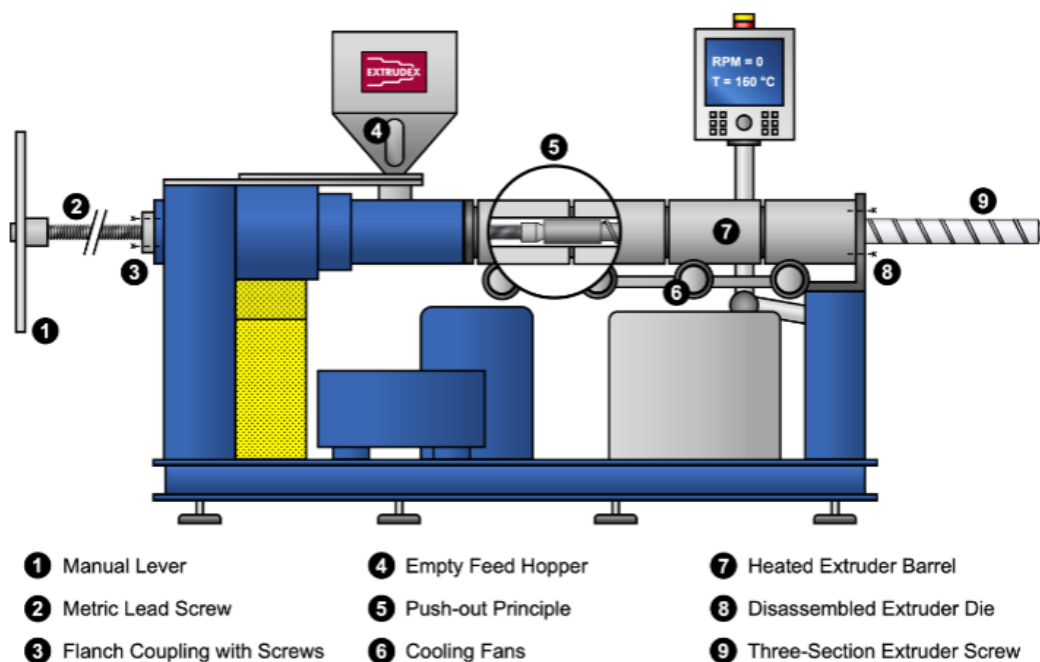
Single-Screw Extruder Pull-out Experiment [22]
